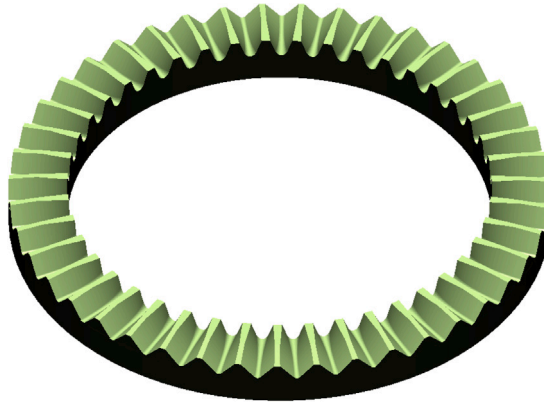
Test face-gear for manufacturing on a 5-axis machine tool.
